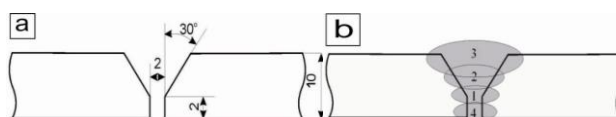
The schema preparation of test sheets for welding: a) preparing sheets, b) arranging weld beads
